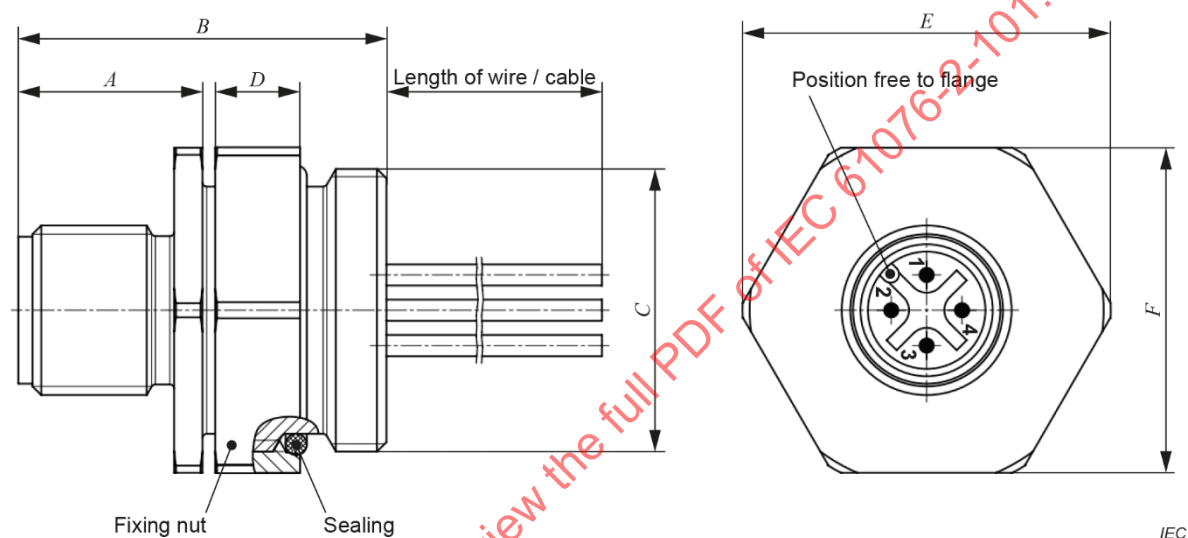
Fixed connector, male contacts, with wire / cable, single hole mounting thread M20 × 1,5, mounting orientation
